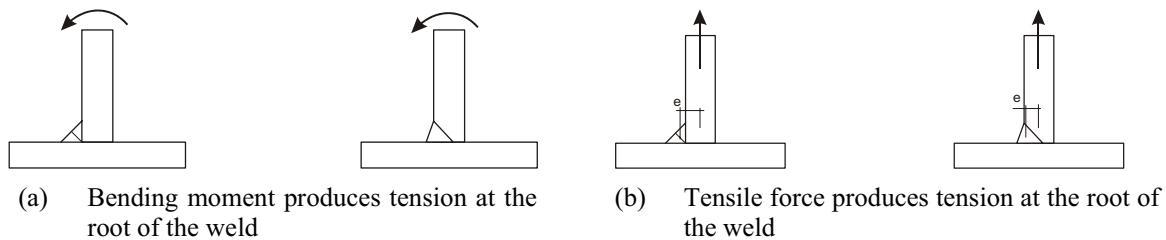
Single fillet welds and single-sided partial penetration butt welds
